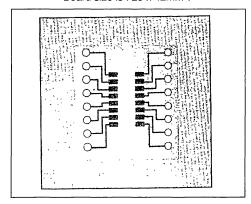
Figure K: Test Board Lay-out for SO Packages (3000 mils body width) Board size is 38 x 43mm<sup>2</sup>.
